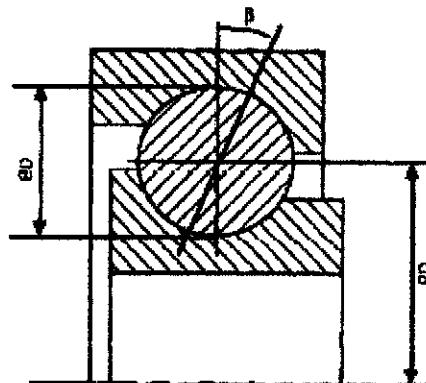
cross sectional view of a ball bearing in which the inner race, outer race and ball are shown
